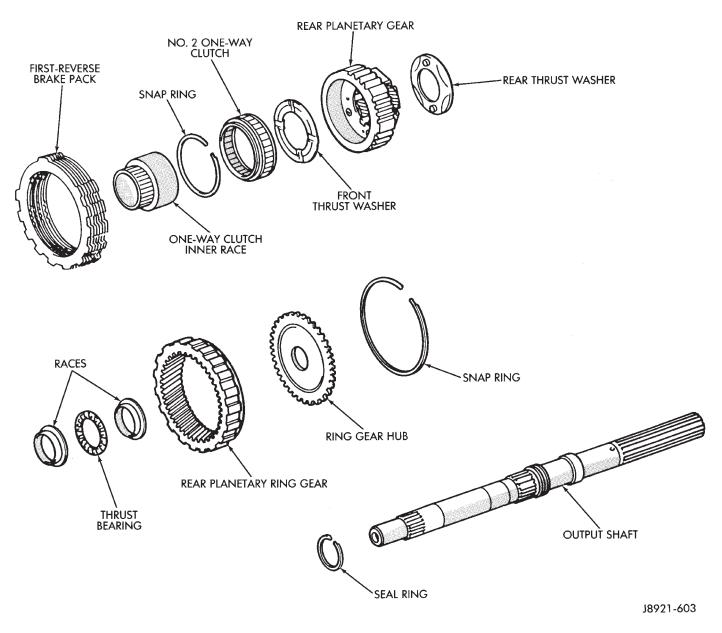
Rear Planetary, Brake Pack, Clutch And Output Shaft Components
